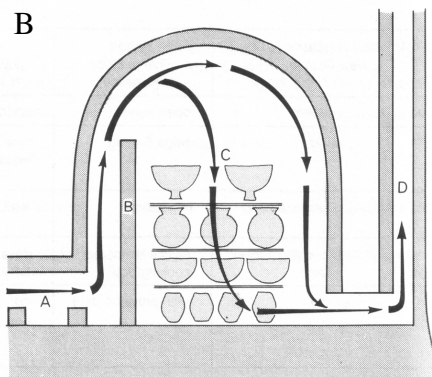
Schematic cross section of a downdraft kiln. a, Firebox. b, Bagwall. c, Chamber. d, Chimney.
